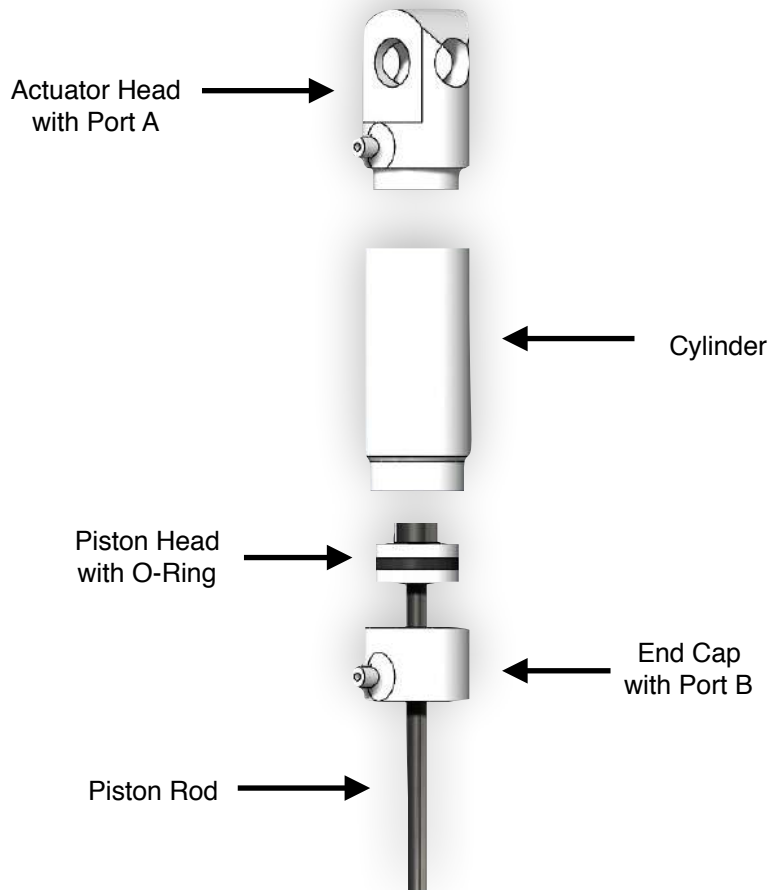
Computer Aided Designs (CADs) of the Final Design , A3, Double-Acting Linear Pneumatic Actuator
